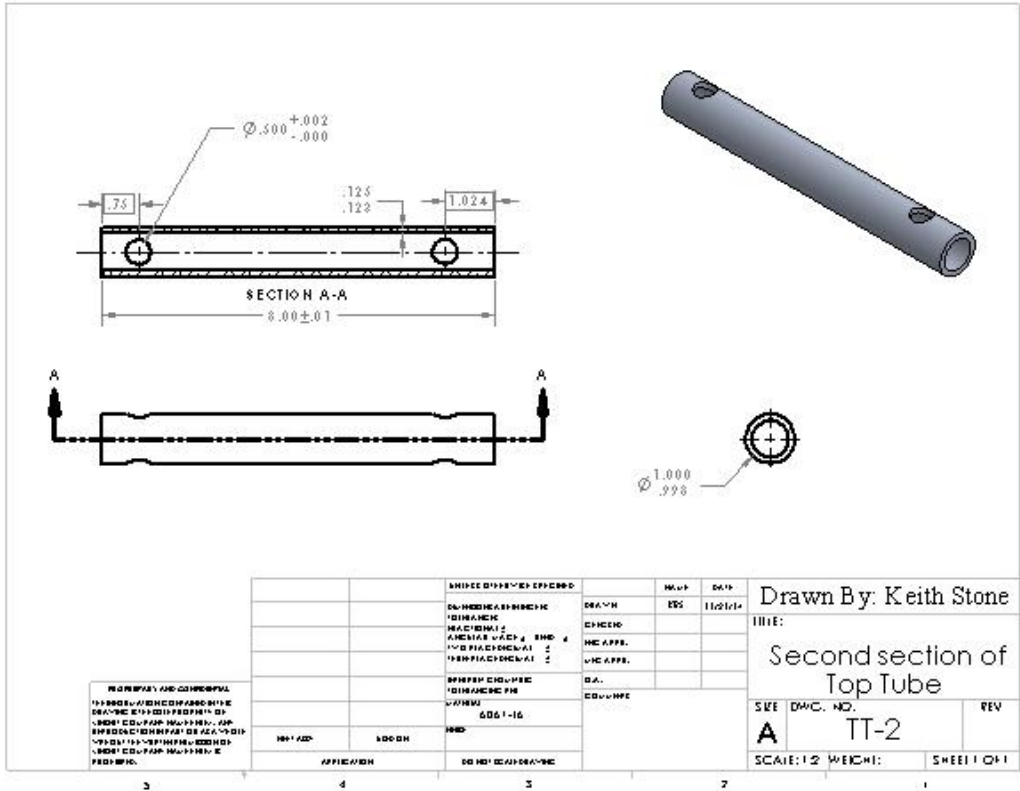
TT-2, Second section top tube from the welded head tube
